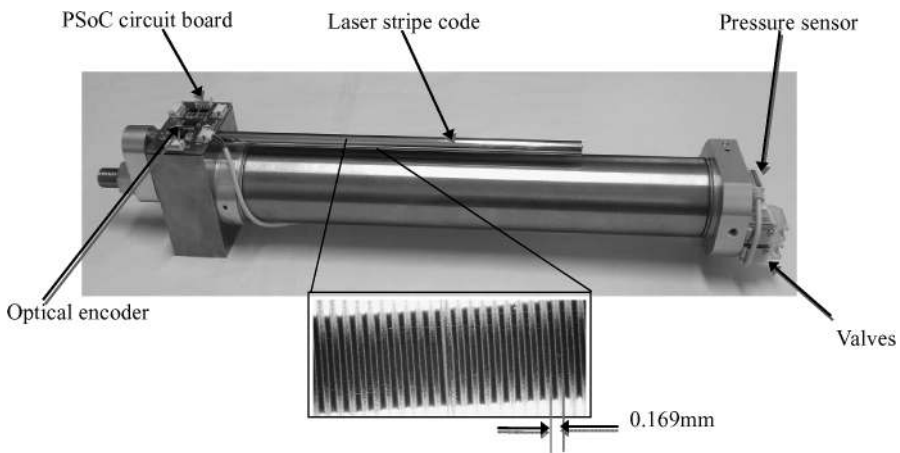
Intelligent actuator parts and zoomed laser strip code on the guide rod.
